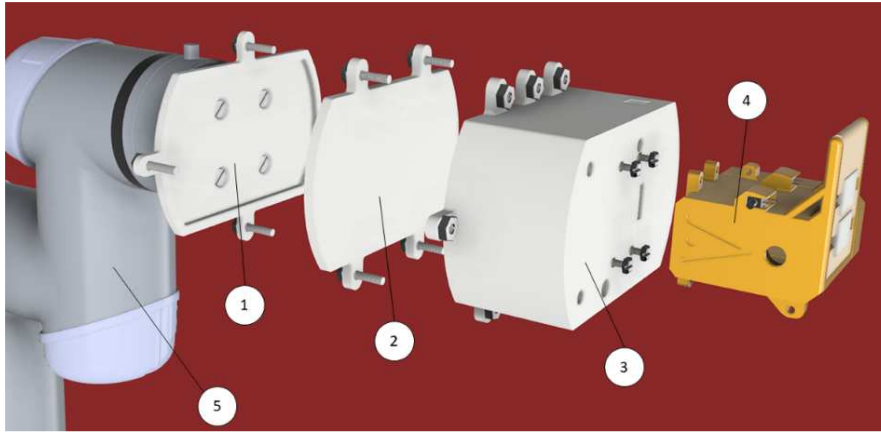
Exploded view of the gripper, the electronic case and the connection to the robot arm. (1) base, (3) case, and (2) case cover. The Gripper Assembly is shown mounted on a UR5 robot arm (5).
